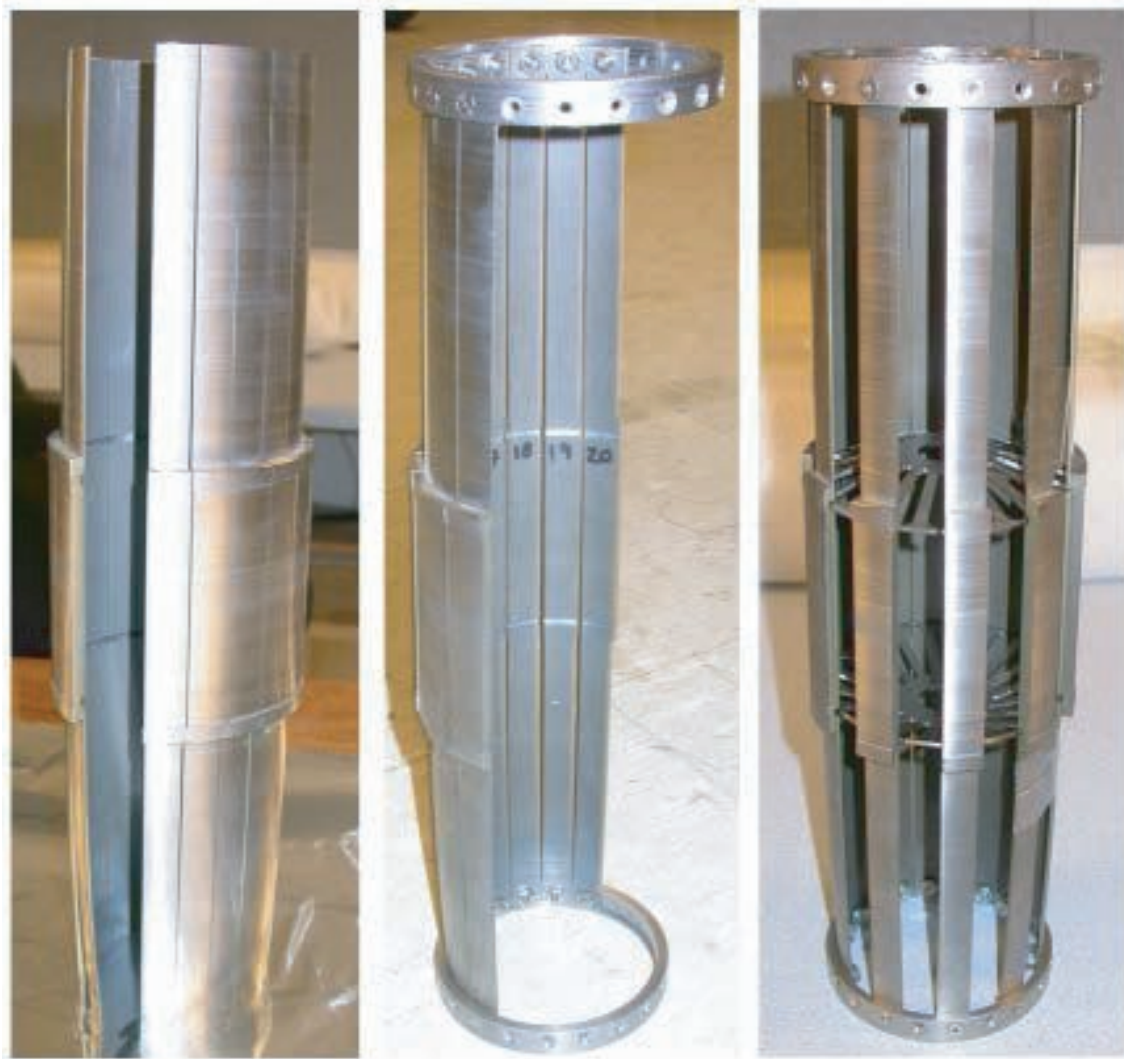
Machined and EDMed cylinder (left), re-forming the sample holder (middle), sample holder with a few missing pieces to see disks inside (right).
